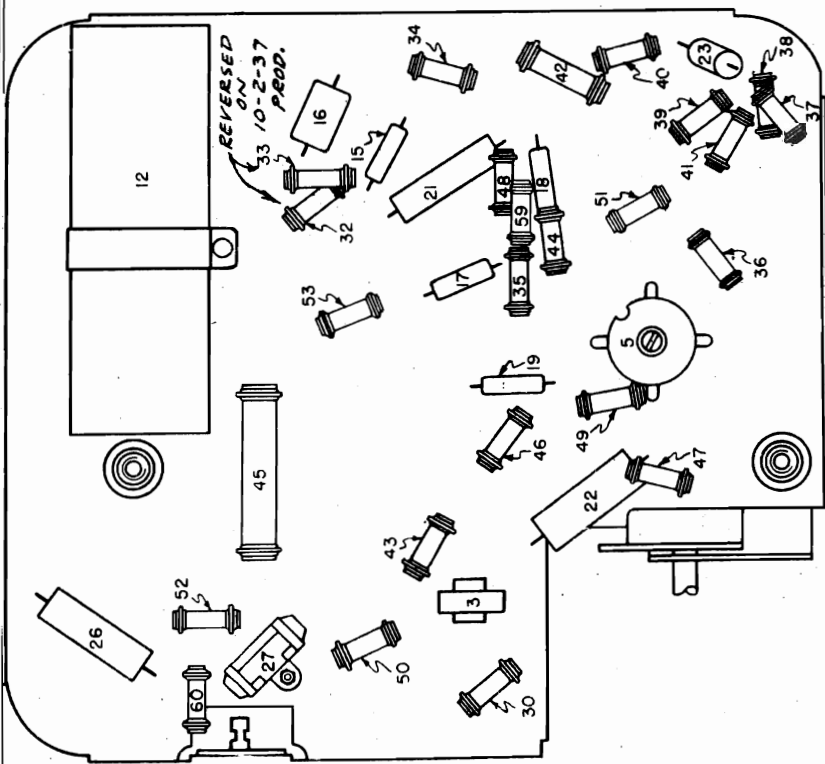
PARTS LAYOUT-BOTTOM VIEW
